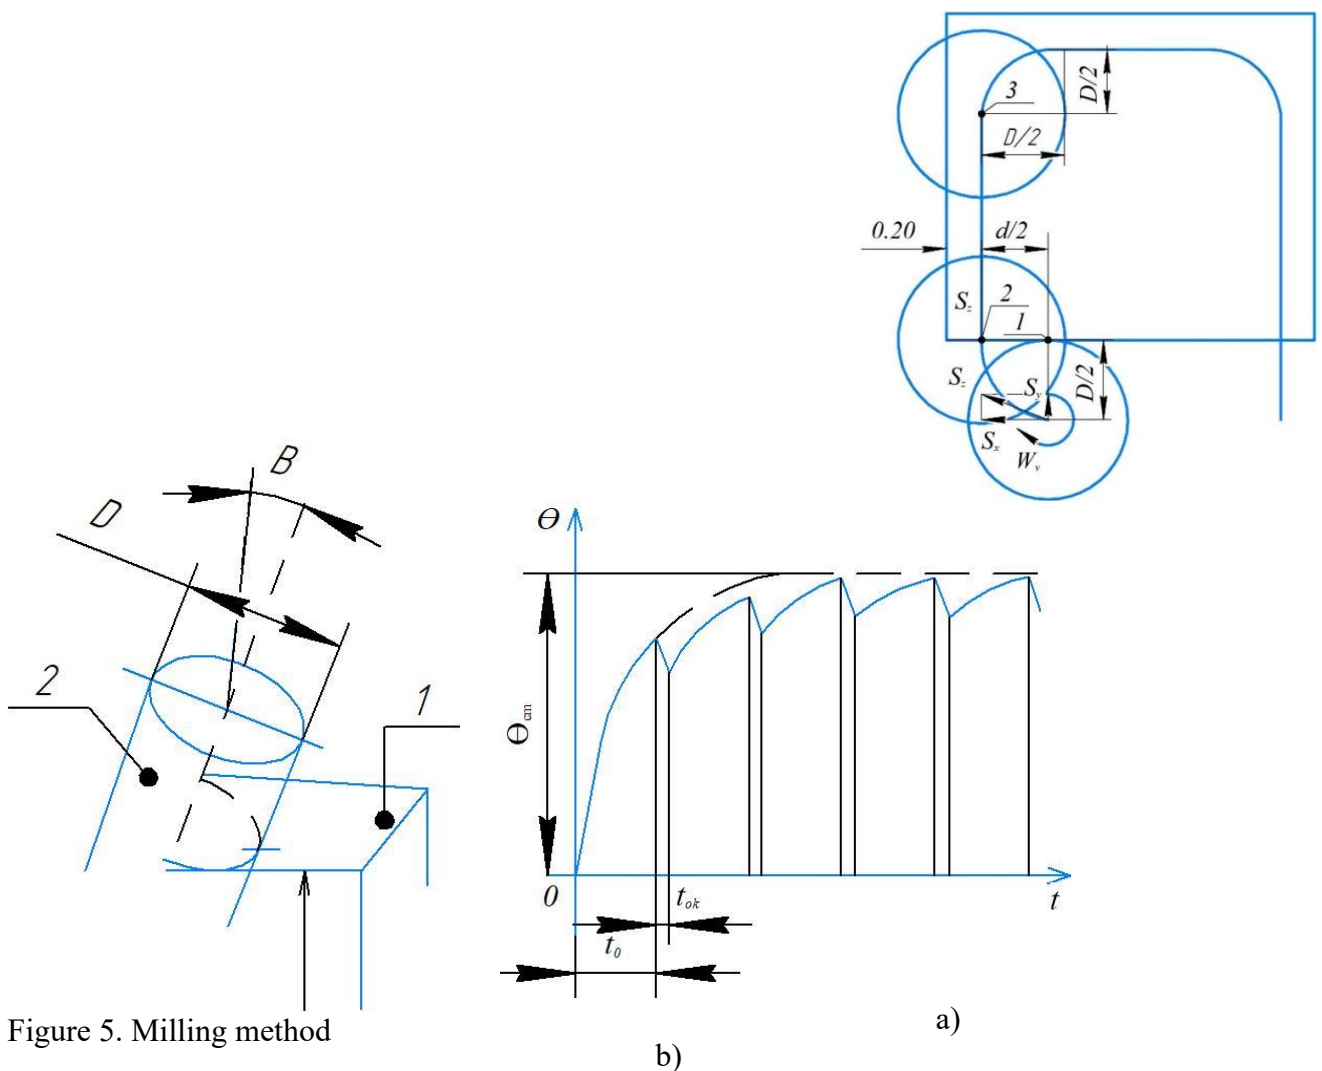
Milling methods: a - end milling; b - intermittent cutting
